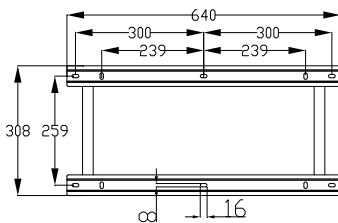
B1-5.1-4.8 wall mounting bracket dimensions (slave device)
